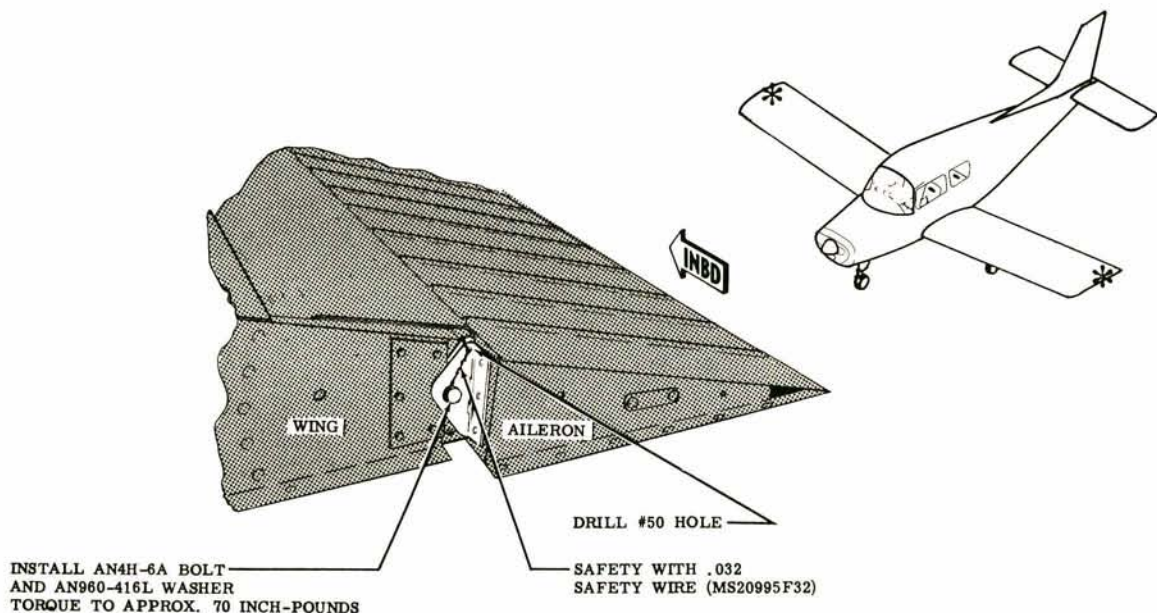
Outboard Aileron Hinge (LH Wing Shown with Wing Tip Removed)
